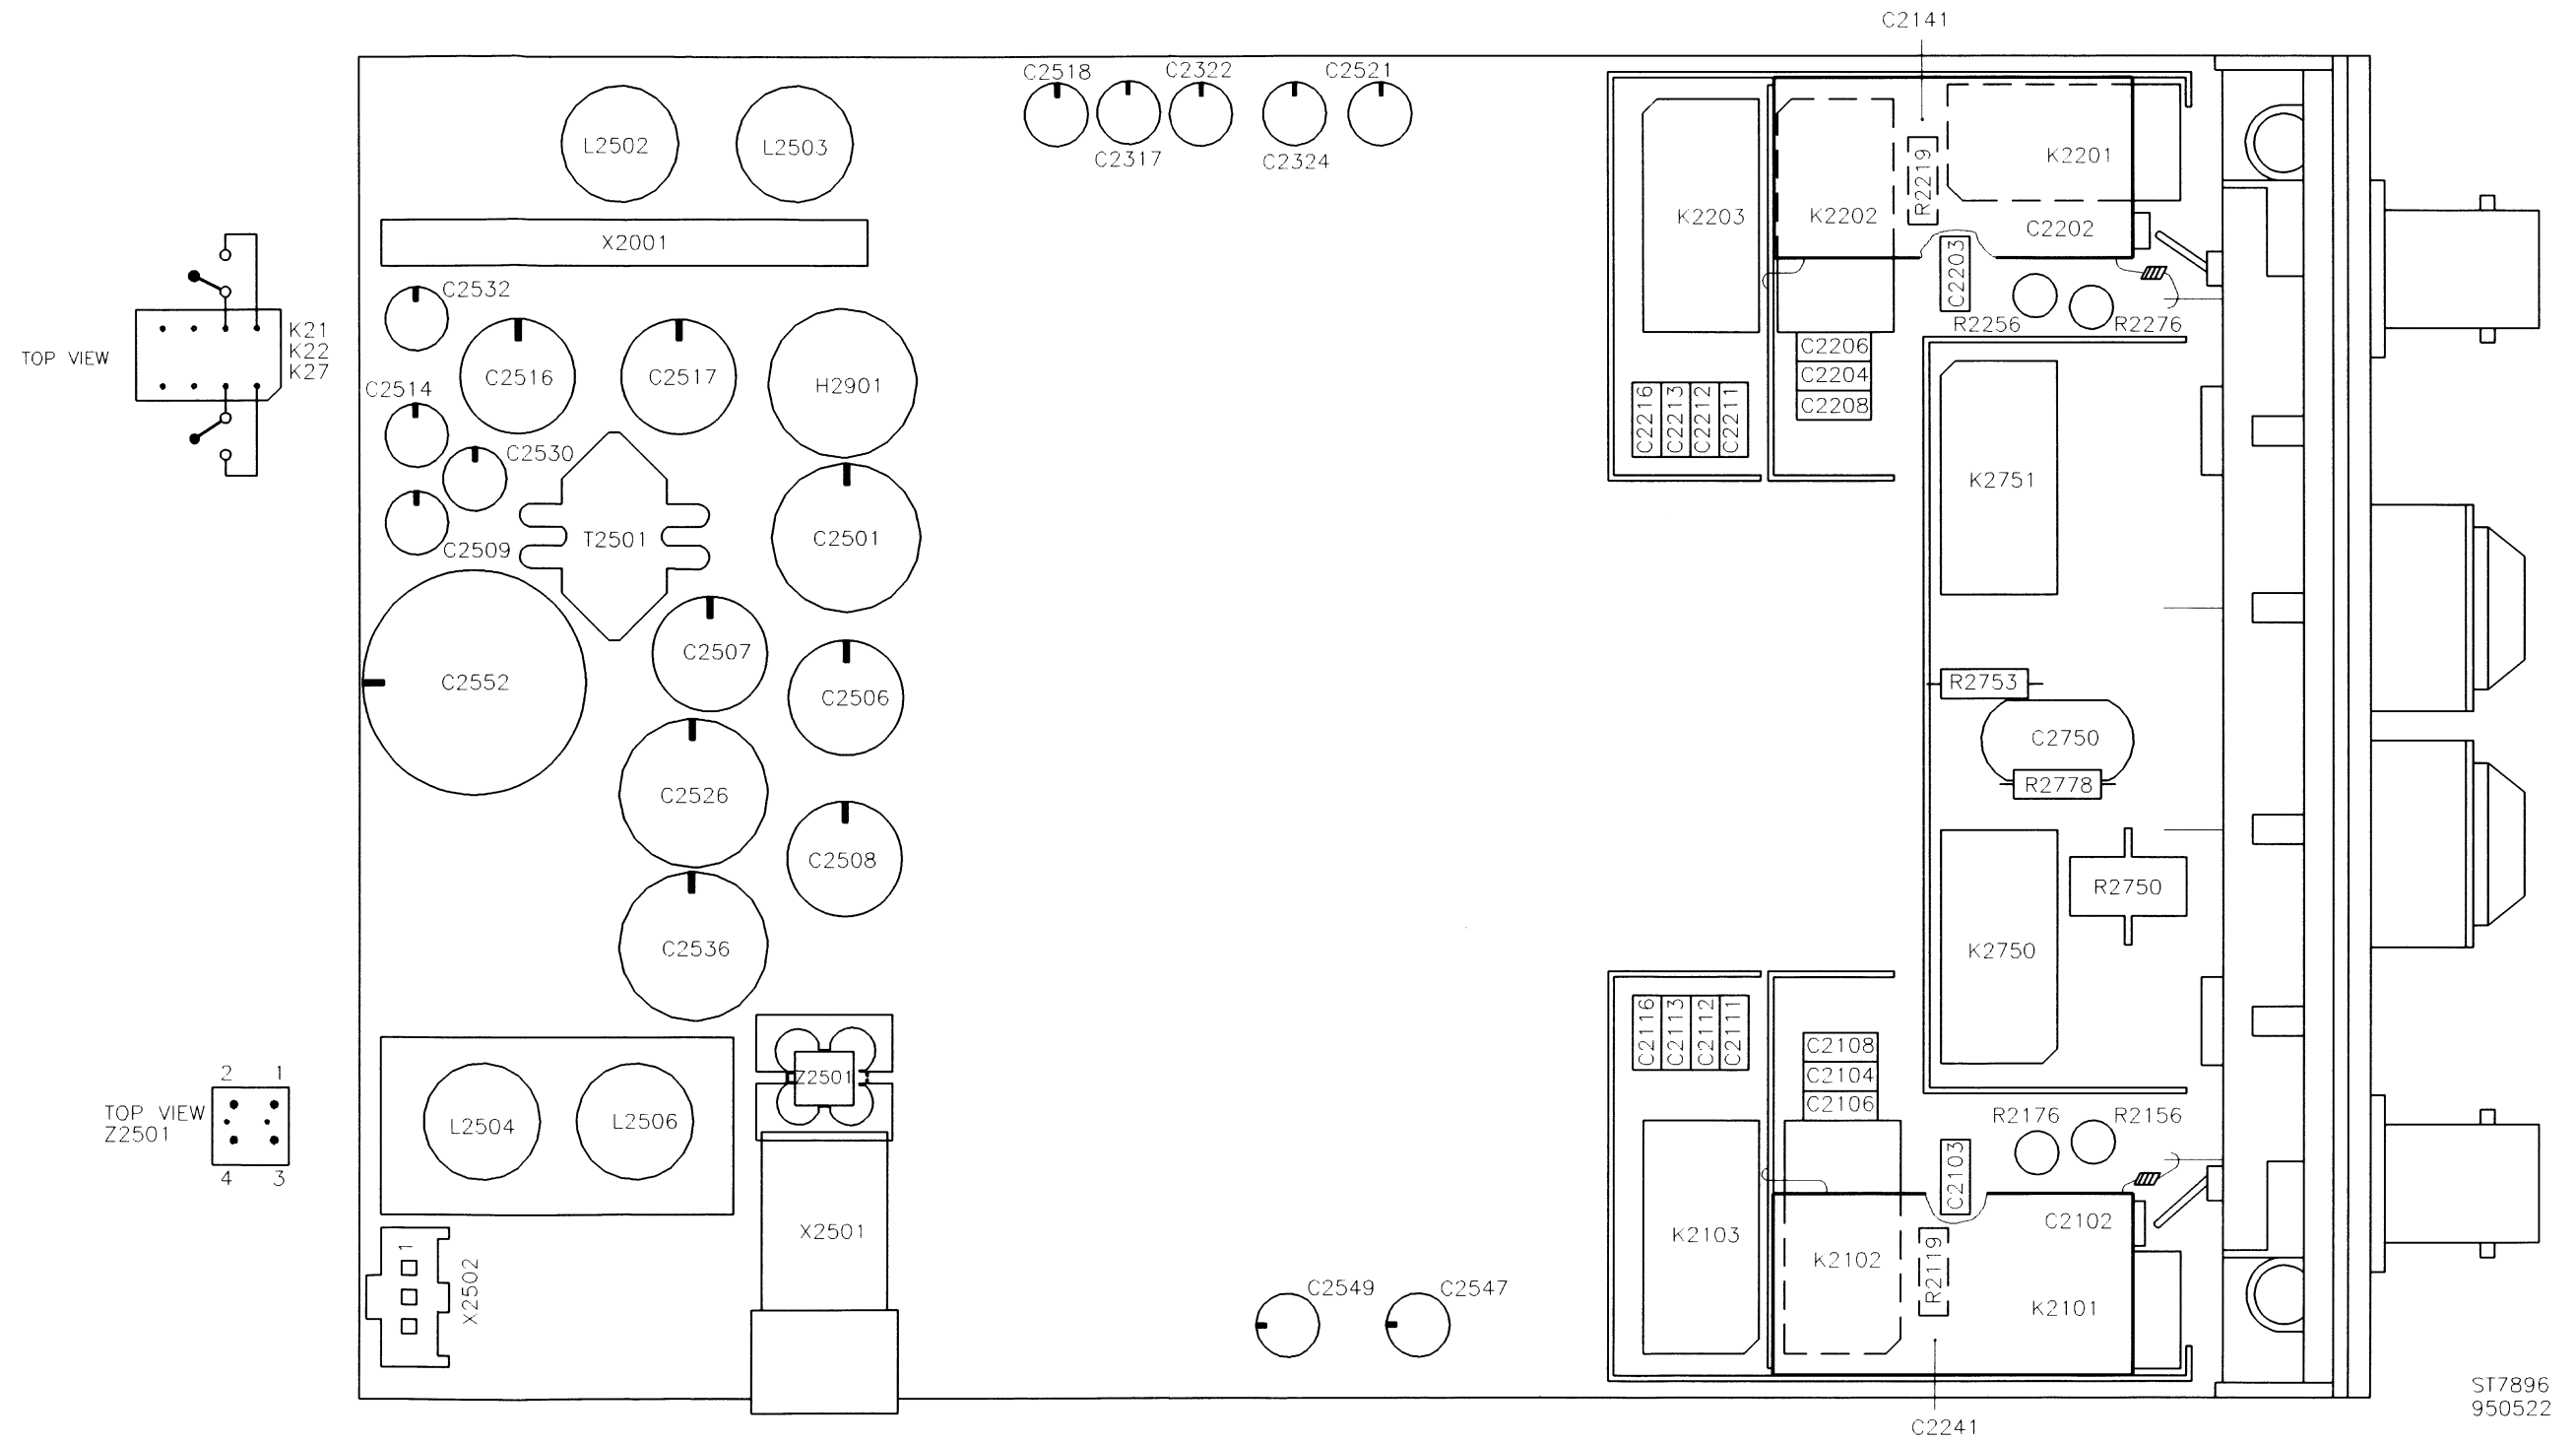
Analog A2 PCB assembly (Wired components side)
